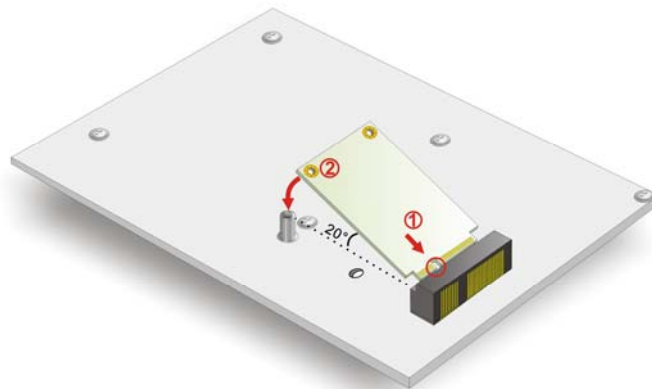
Insert the Full-size PCIe Mini Card into the Socket at an Angle
